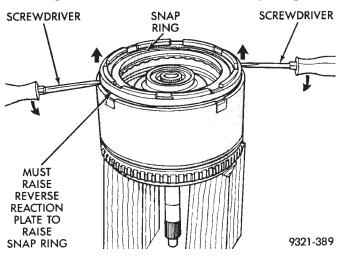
Seating Snap Ring to Determine Reverse Clutch Clearance
